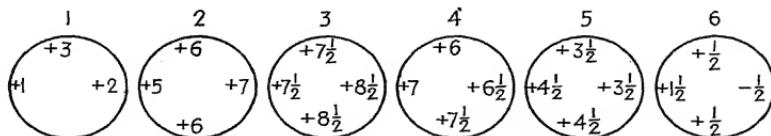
This is a record of the defects in a "bowed" cylinder block.
